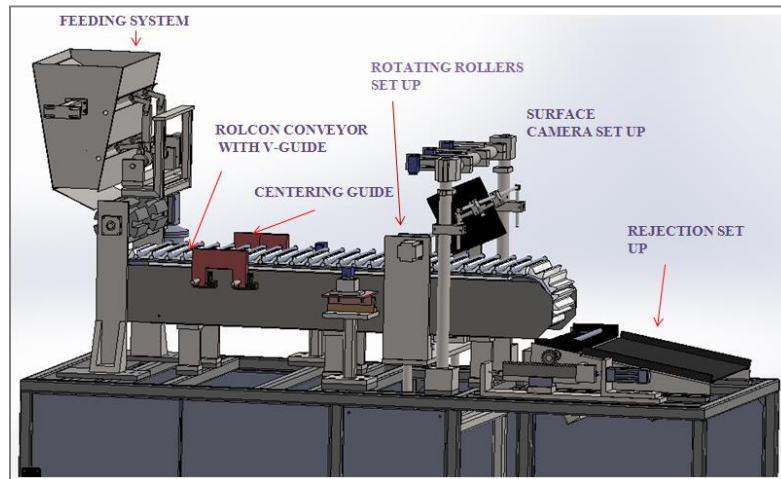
3D cut-open view of automatic tube inspection system
